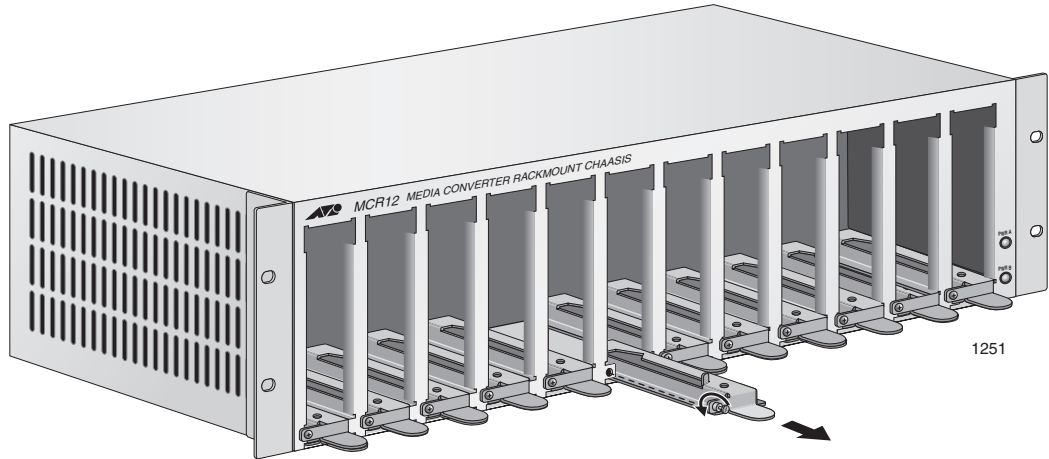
Removing the Mounting Rail from a Slot in the AT-MCR12 Chassis
